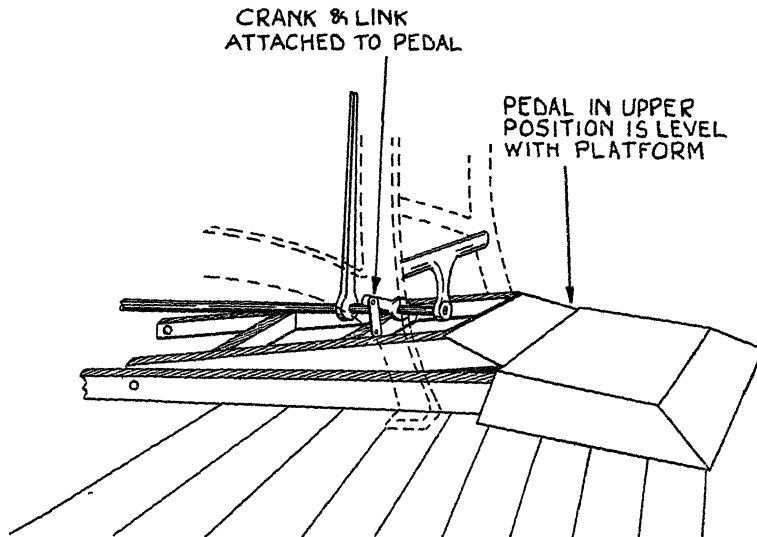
Improved pedal fitted to Shirt and Collar Ironing Machine.
